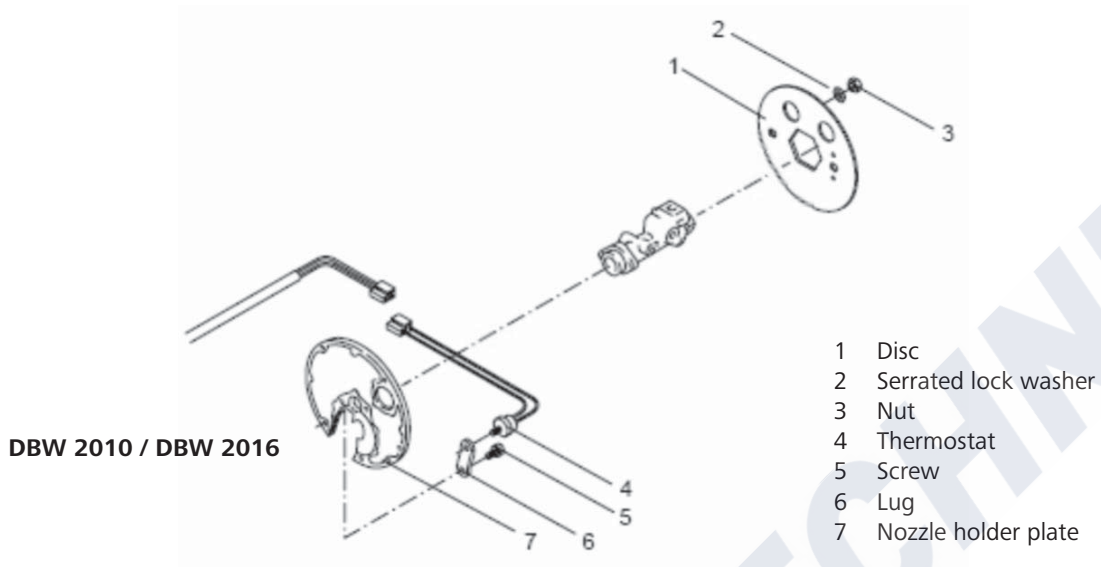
Replacing thermostat of nozzle holder pre-heating unit
